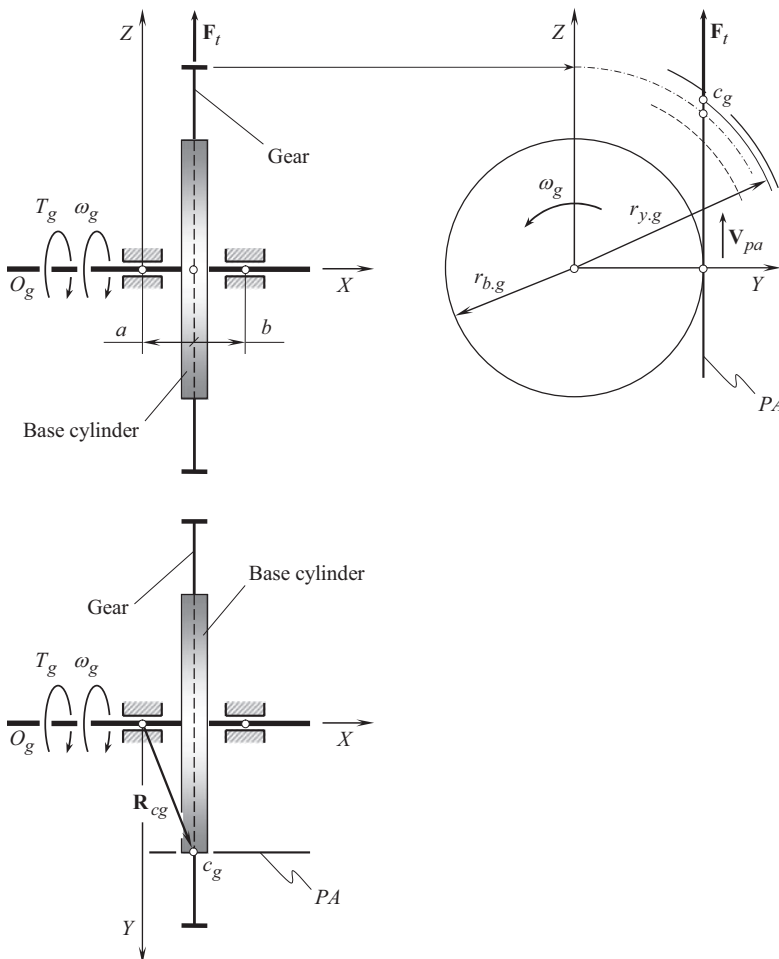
Bending torque in geometrically accurate spur parallel-axes gearing.
